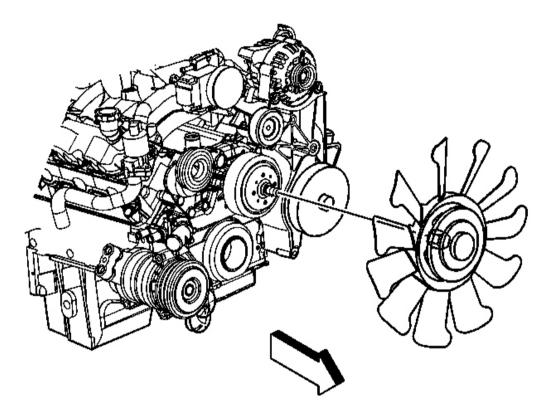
View Of Fan Assembly Courtesy of GENERAL MOTORS CORP.
